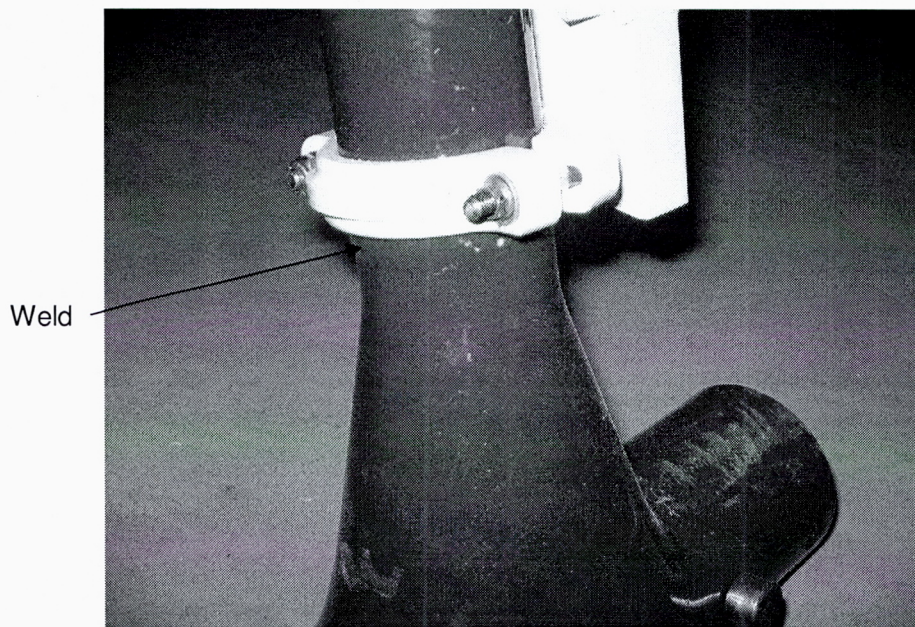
Aft Beam Installation, Bottom Clamp
